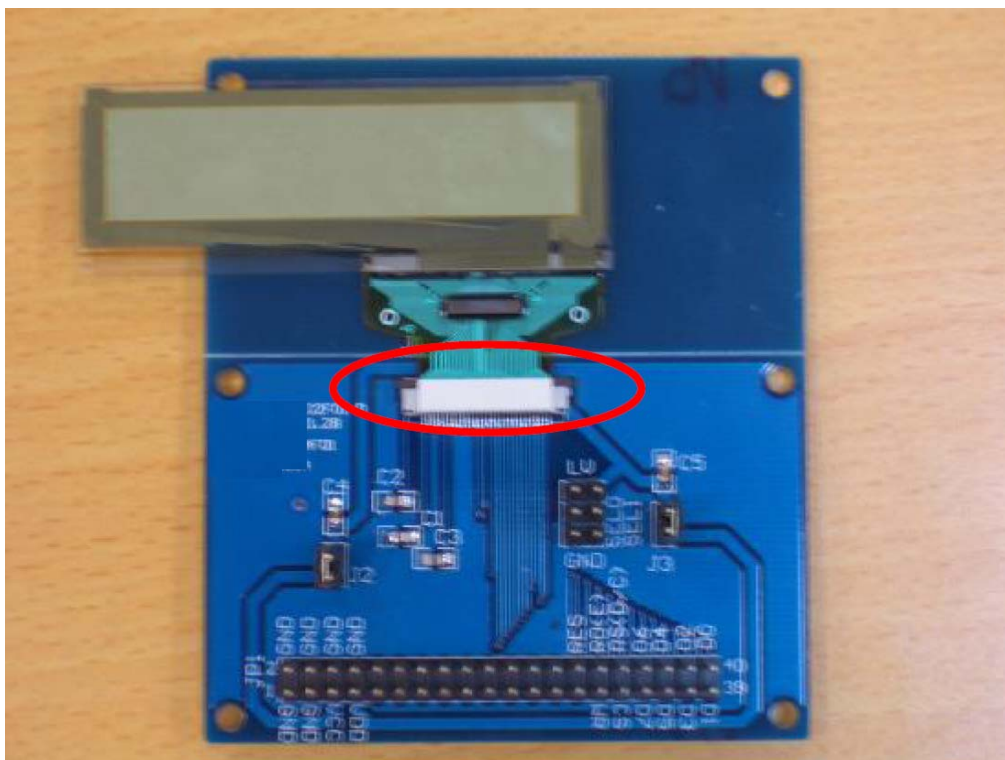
the DD-12833YW-1A and EVK assembled (Top view)
